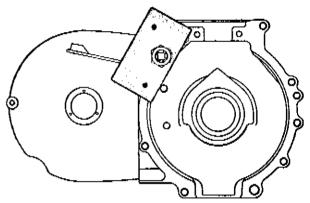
Withdrawing Blind Camshaft Bush. (Service Tool No. 61-3159).
